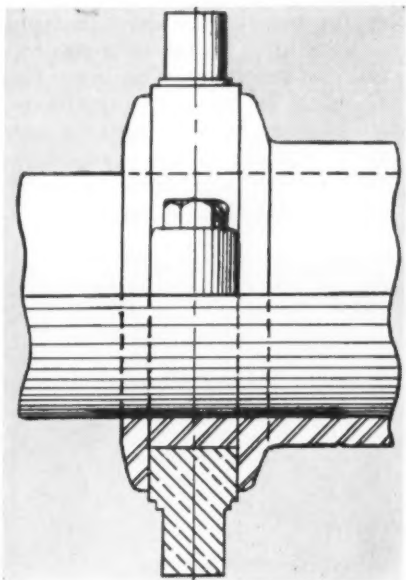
This design of shifting collar utilizes double-flange spool-like shifting arrangement.
